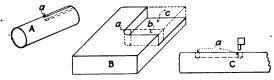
A, Diameter of drilled hole (a) equals width of keyway. In such a job as B, first drill hole at (a) say $\frac{1}{4}$ diameter, next plane slot (b) hen plane remainder (c) the cut ending in slot (b). Such a job as C requires a drilled hole at the beginning and also at the end of the keyway. Keyways such as shown in A and C are cut easier in the milling machine, but occaionally must be cut in the shaper or planer.
